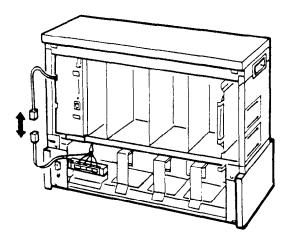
Connecting the PSF-P-20 PSU to the Terminal Board
